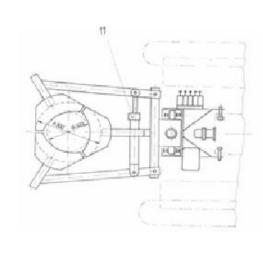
Constructive scheme of the equipment to extract plants with root ball EXPLANT 500
